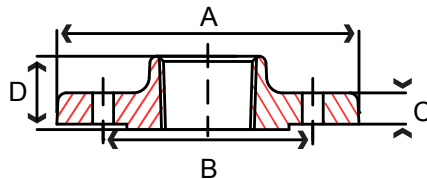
TH2 & 18TH2 – 300 lb. Threaded Companion Flange
